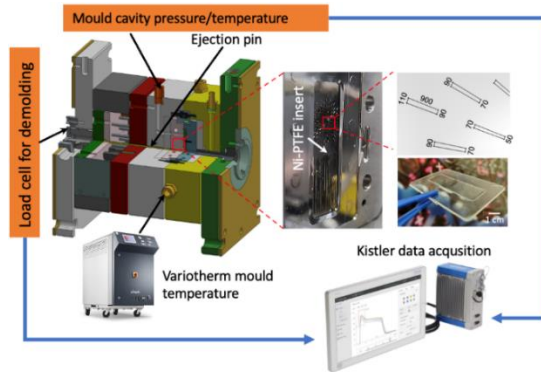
Injection moulding system with mould designed with load cell for demoulding forces and cavity pressure/temperature measurement, where the Ni-PTFE insert is embedded into motion half of the mould.
